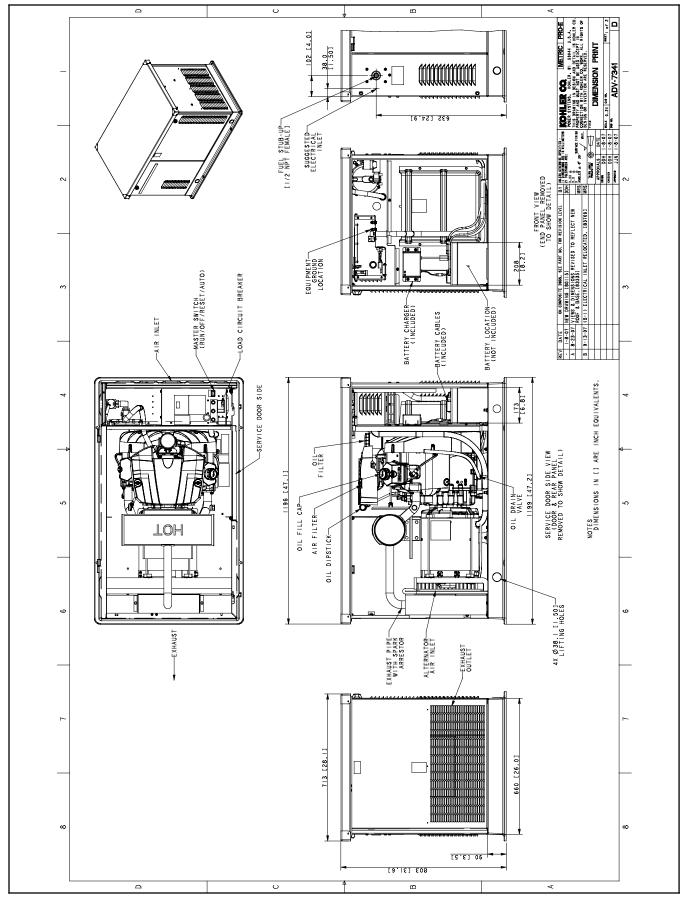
Generator Set Mounting Details and Dimensions, 17/18 kW Models, ADV-7341-B, Sheet 1
